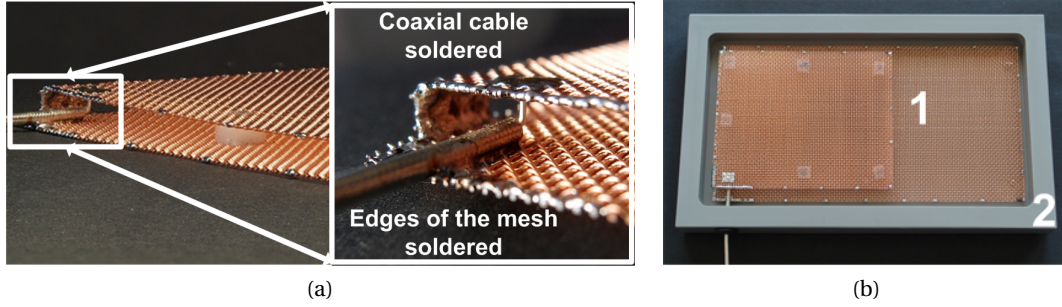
Conductive parts of the copper-mesh PIFA prototype: (a) With introduced spacers and soldered coaxial cable and (b) Placed inside the mold.
